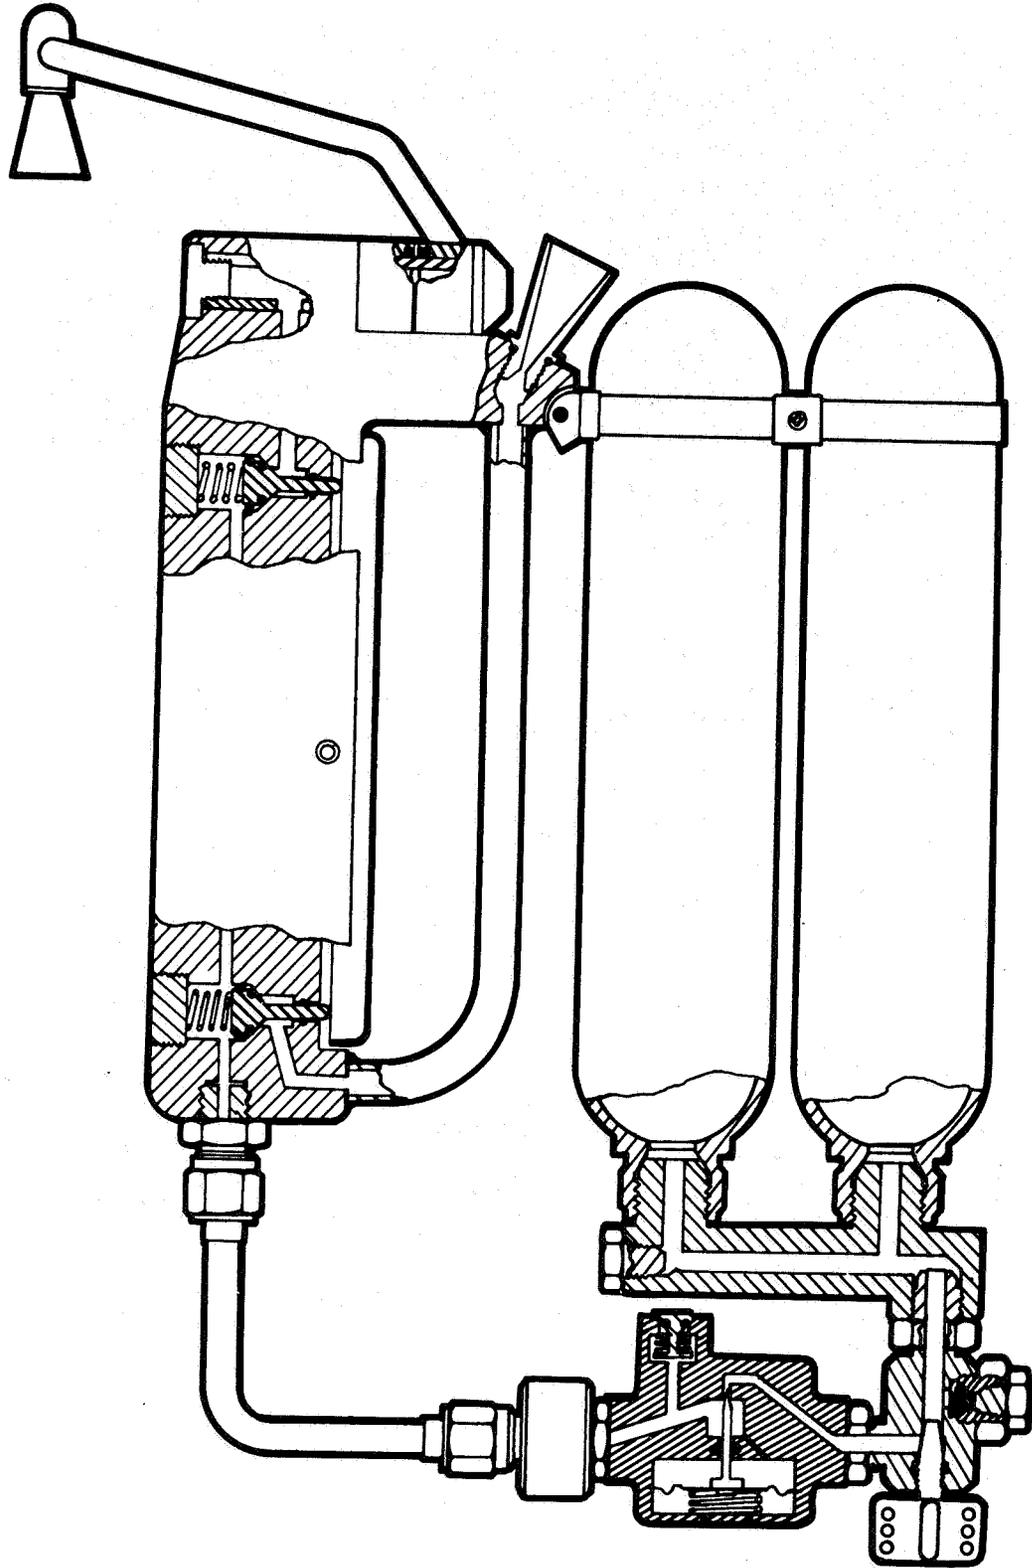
Cutaway of Gemini IV Hand Held Maneuvering Unit.
